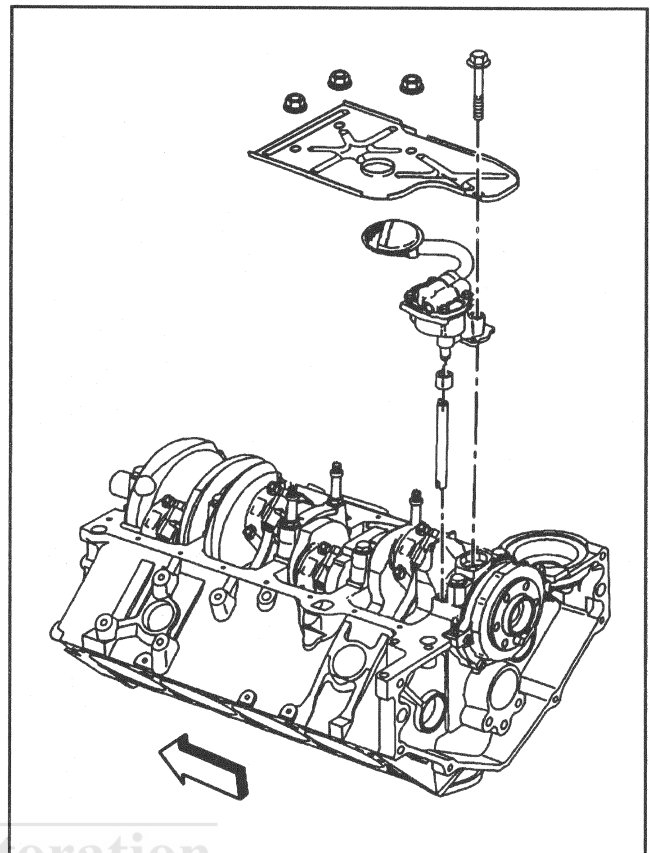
Oil Pump, Crankshaft Oil Deflector, Driveshaft, and Retainer
